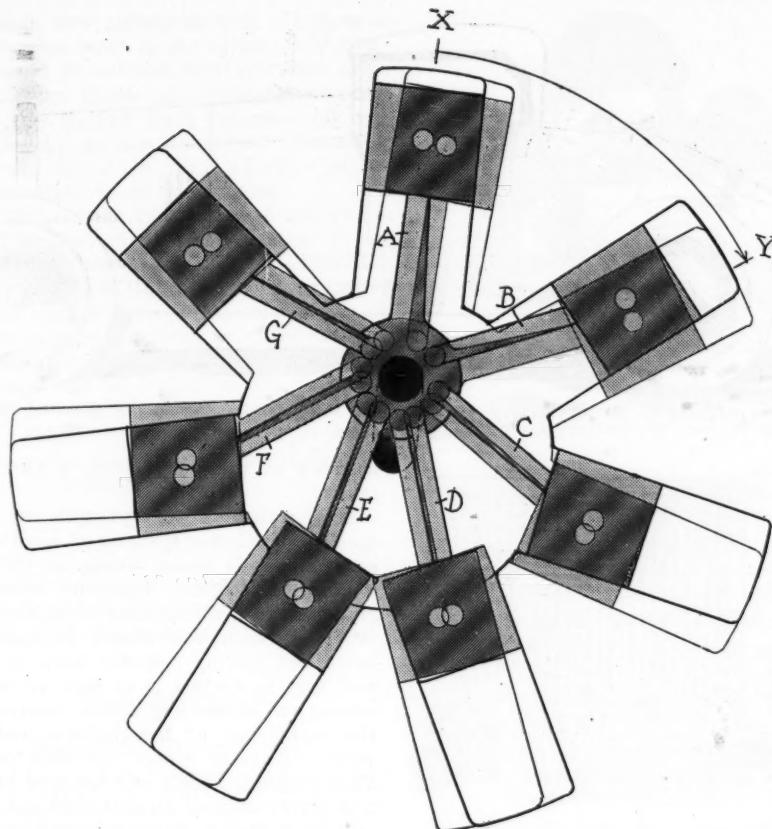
Gnome seven-cylinder, showing connecting rods fastened to one throw of the crank
